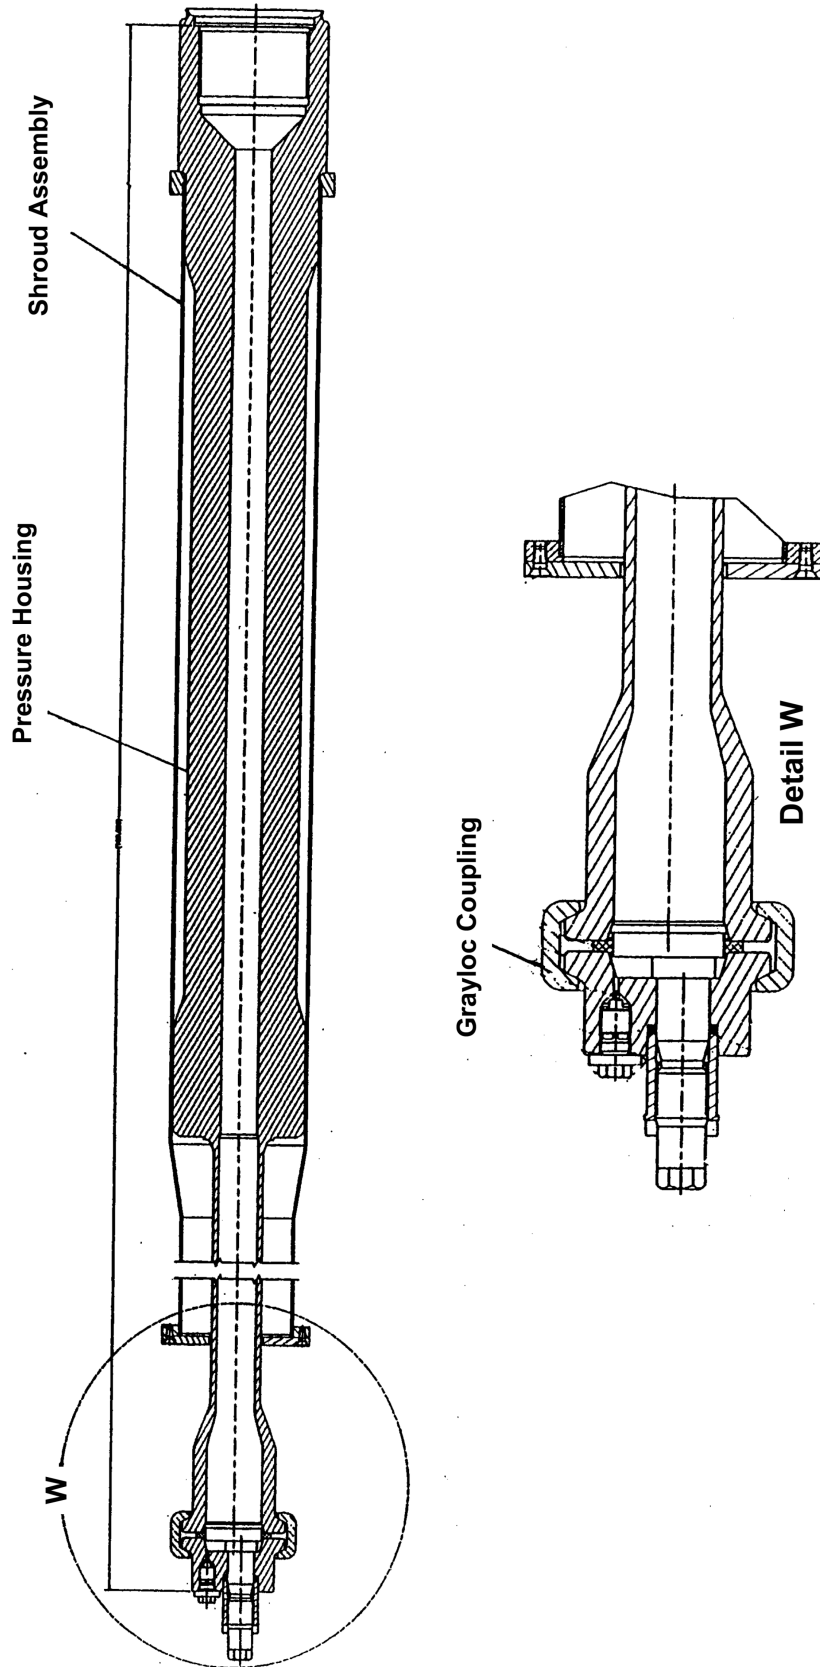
CONTROL ELEMENT DRIVE MECHANISM (MAGNETIC JACK)
